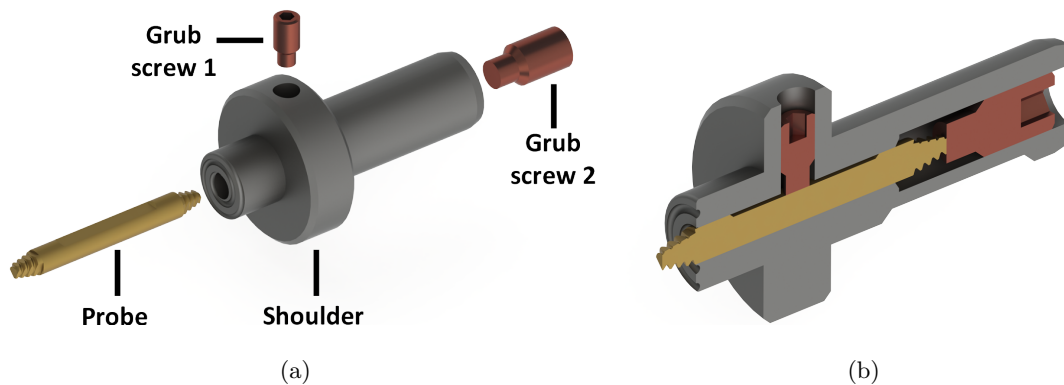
Exploded view (a) and assembly view (b) of the utilized tool.
